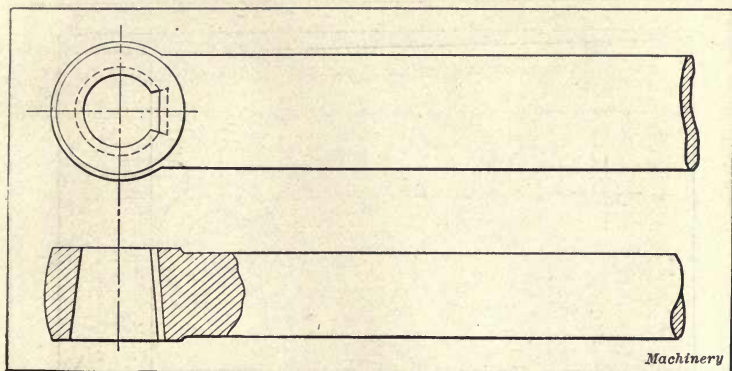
Bicycle Crank, in Hub of which Dovetail Keyseat is Broached
